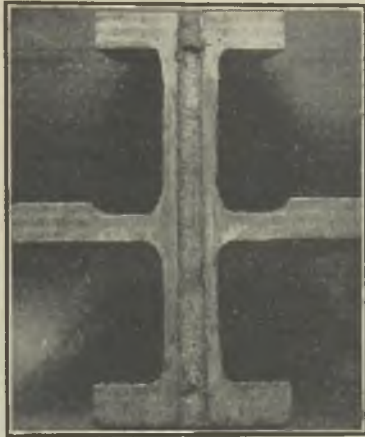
SHOWS TOP HALF OF CASTING AFTER SAWING THROUGH THE PLANE OF MOULD JOINT.
